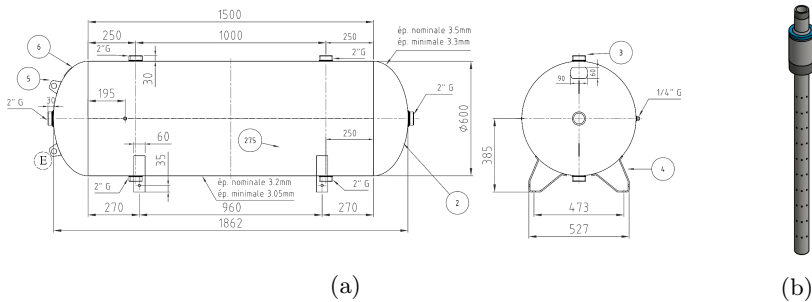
a) Technical drawing of the buffer tank. b) CAD drawing of the seeding diffuser inserted inside the tank. Dimensions in mm.
